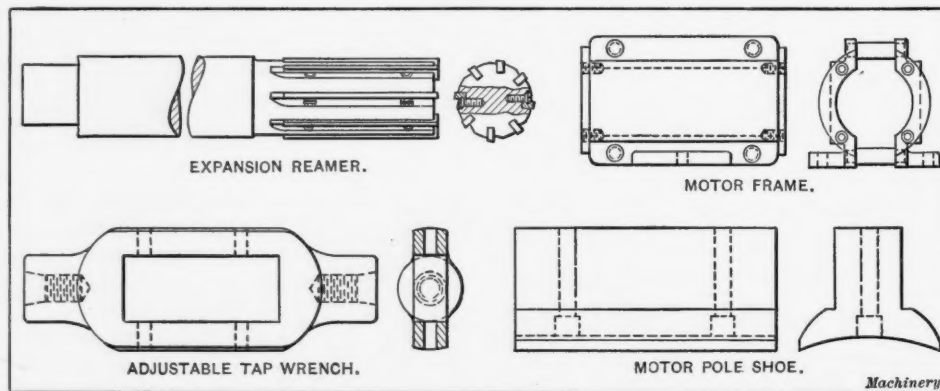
Examples of Work done on Langelier Drilling and Tapping Machine
